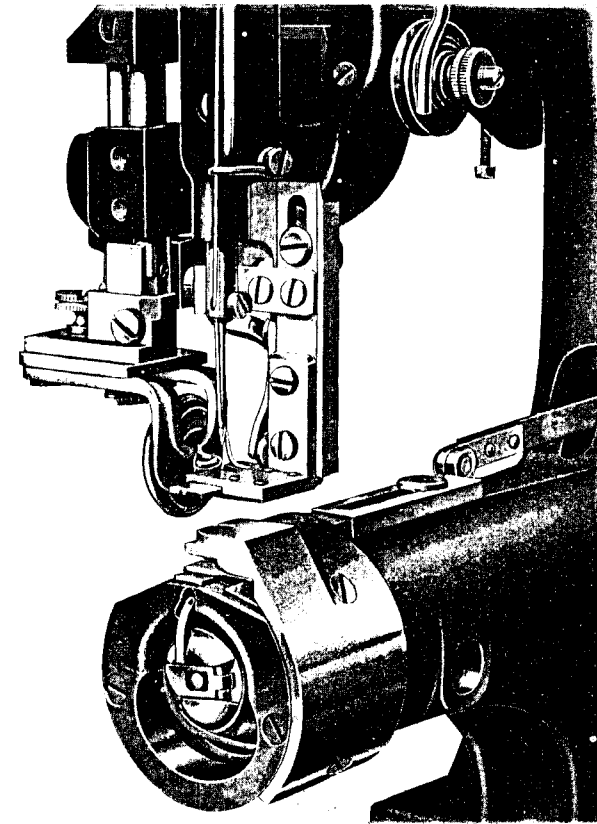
VIEW OF MACHINE 58-14 SHOWING BUTTON IN THE BUTTON CLAMP
